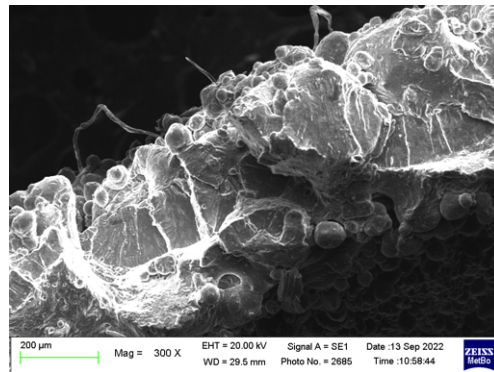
Final fracture surface of a 0.6 mm thick specimen as built
